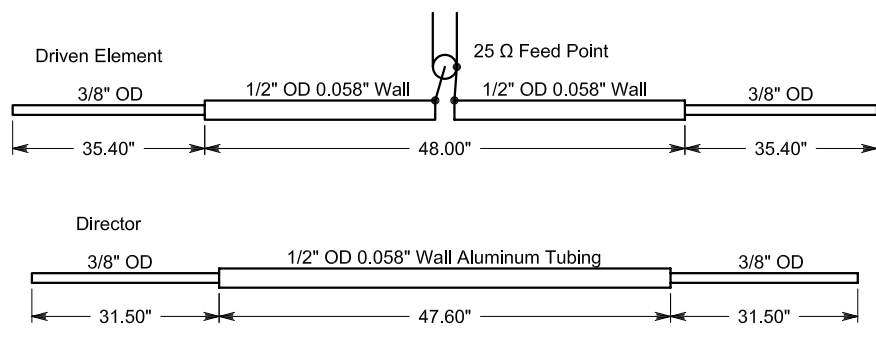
6061-T6 aluminum element dimensions for the 6-meter beam.
